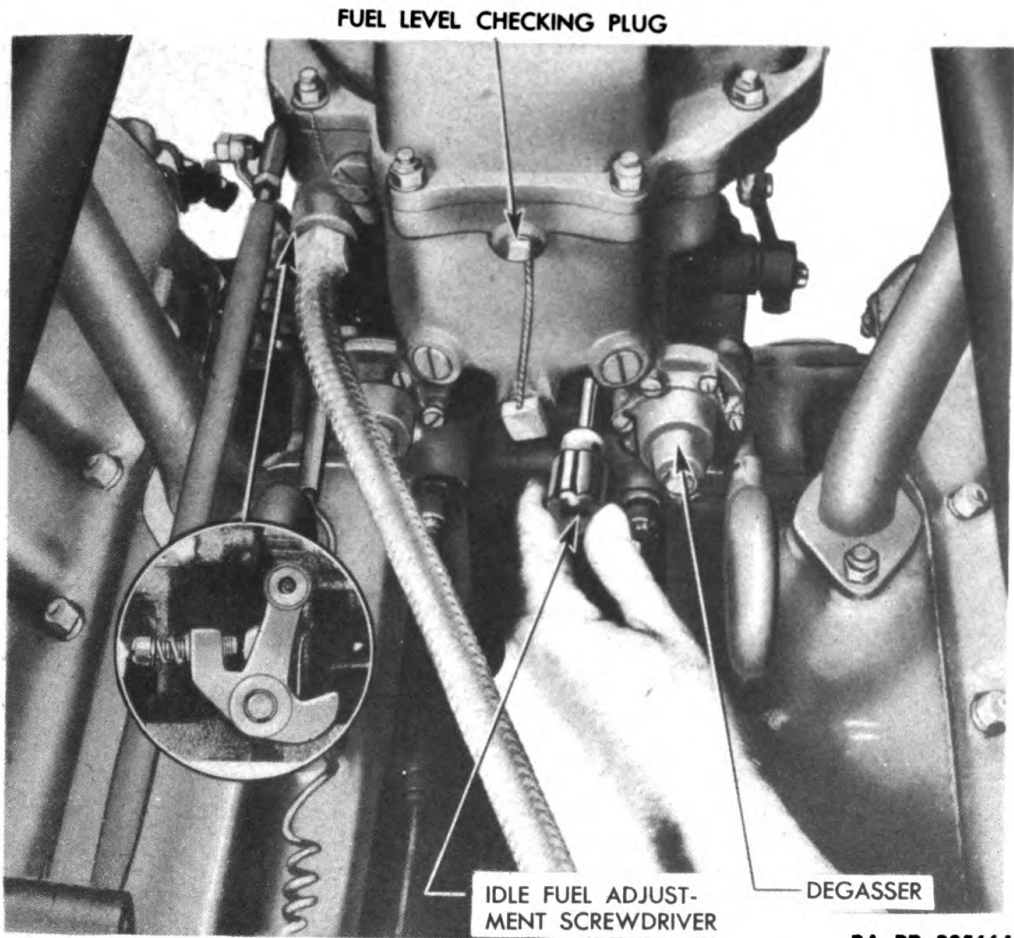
Adjusting Idling Fuel Mixture Using Special Screwdriver (41-S-1652-500)
